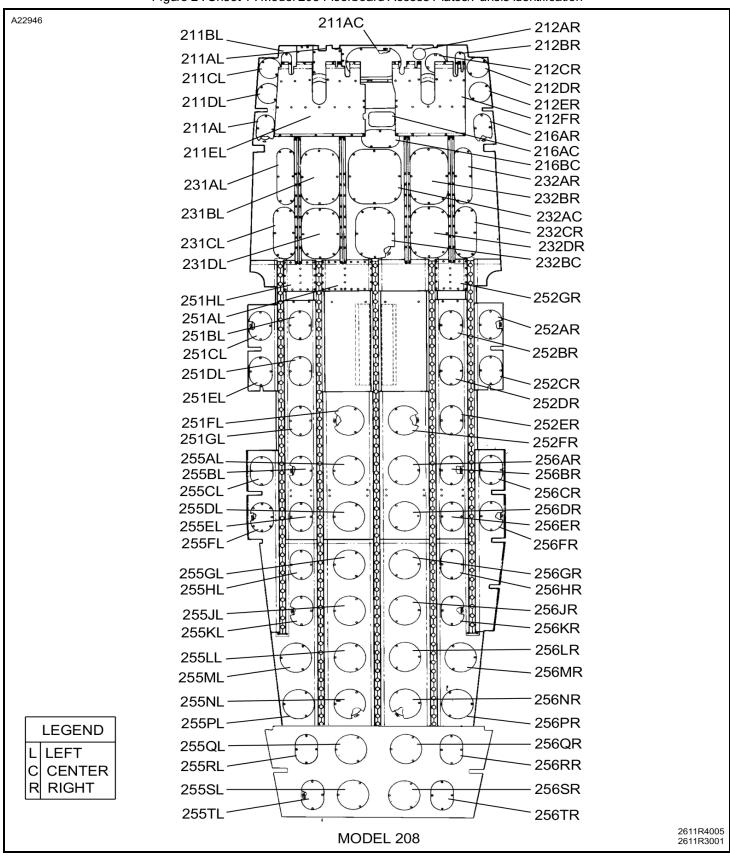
Sheet 1: Model 208 Floorboard Access Plates/Panels Identification
